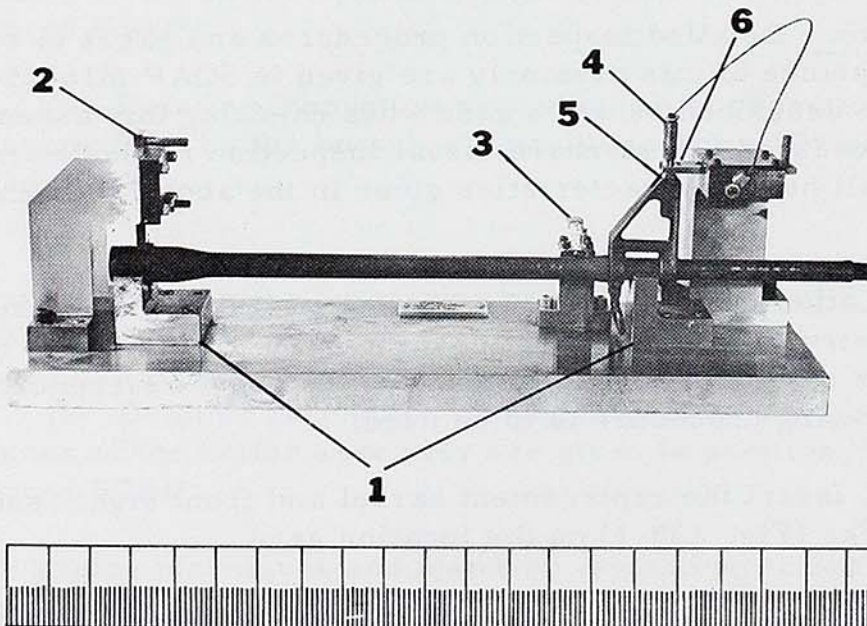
Replacement Barrel and Front Sight Assembly in Position on the Location Gage.
